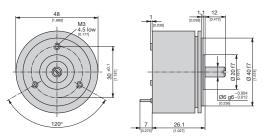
KINAX 3W2 with special drive shaft at front only, Ø 6 mm [0.236"], length 12 mm [0.472"].
